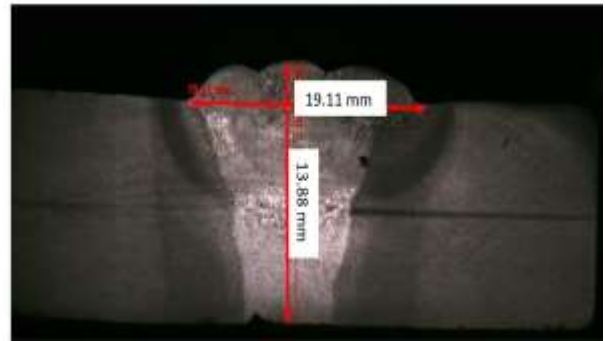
Macroprofile of carbon steel welded at heat input of 2030 J/mm.
